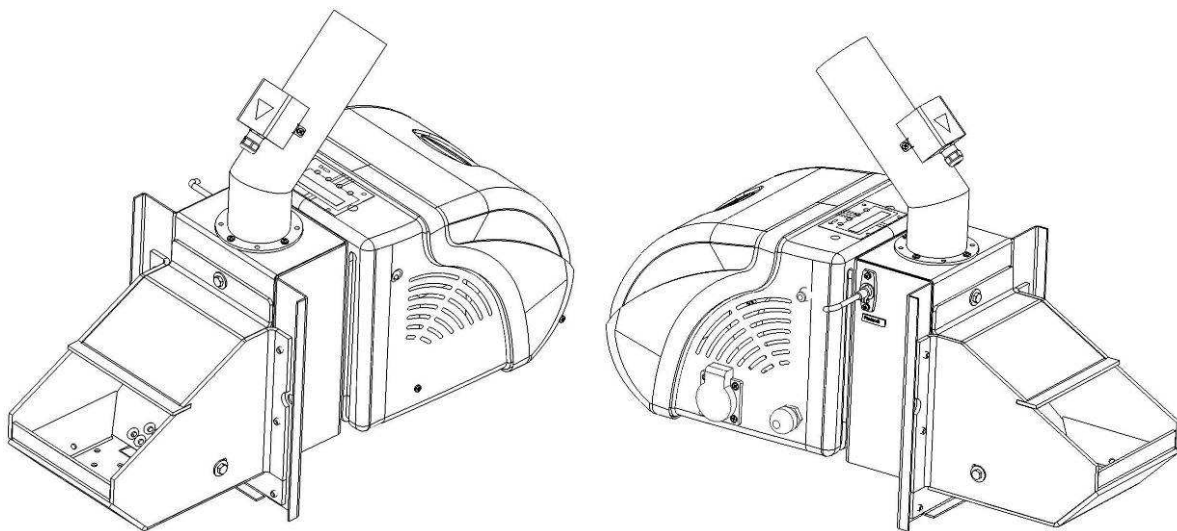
Isometric view of the main unit of the pellet burner of series “GP IV” – side views;
